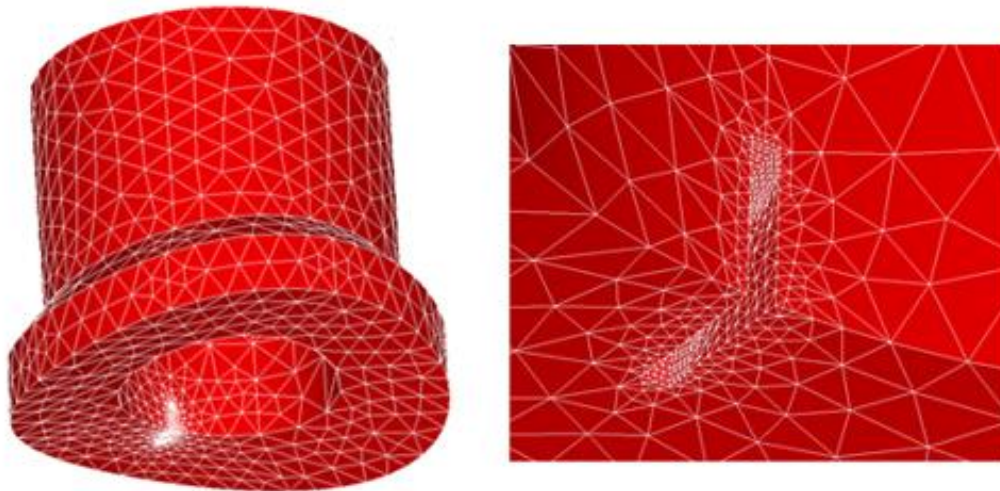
5 Representation of inner wall crack location and modelling
